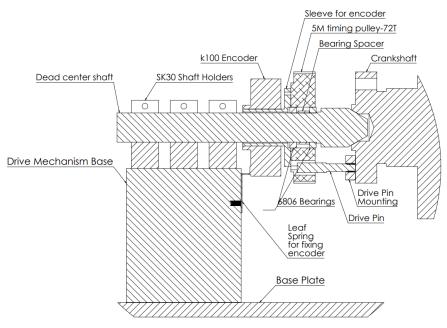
CROSS SECTION OF DRIVE UNIT
